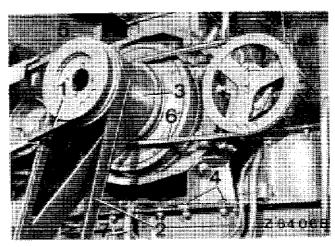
Removing Various Engine Connections Near Drive Pulley (935 Shown)
